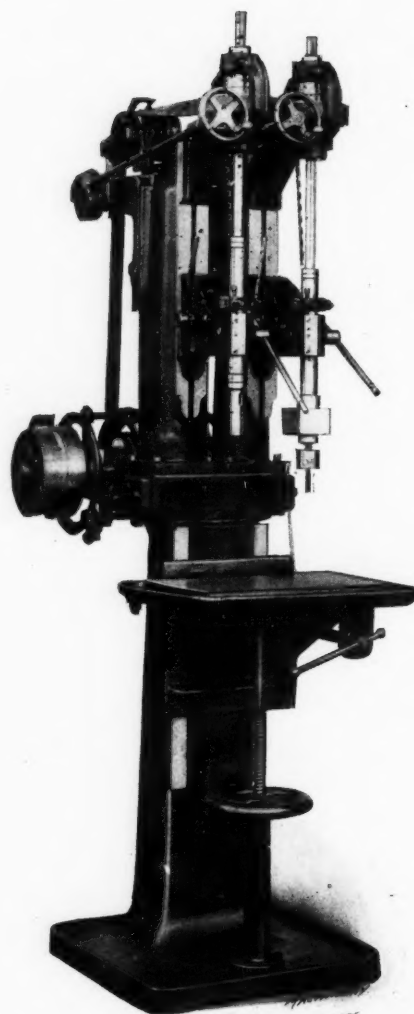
Henry & Wright Drilling Machine equipped with New Tapping Attachment
